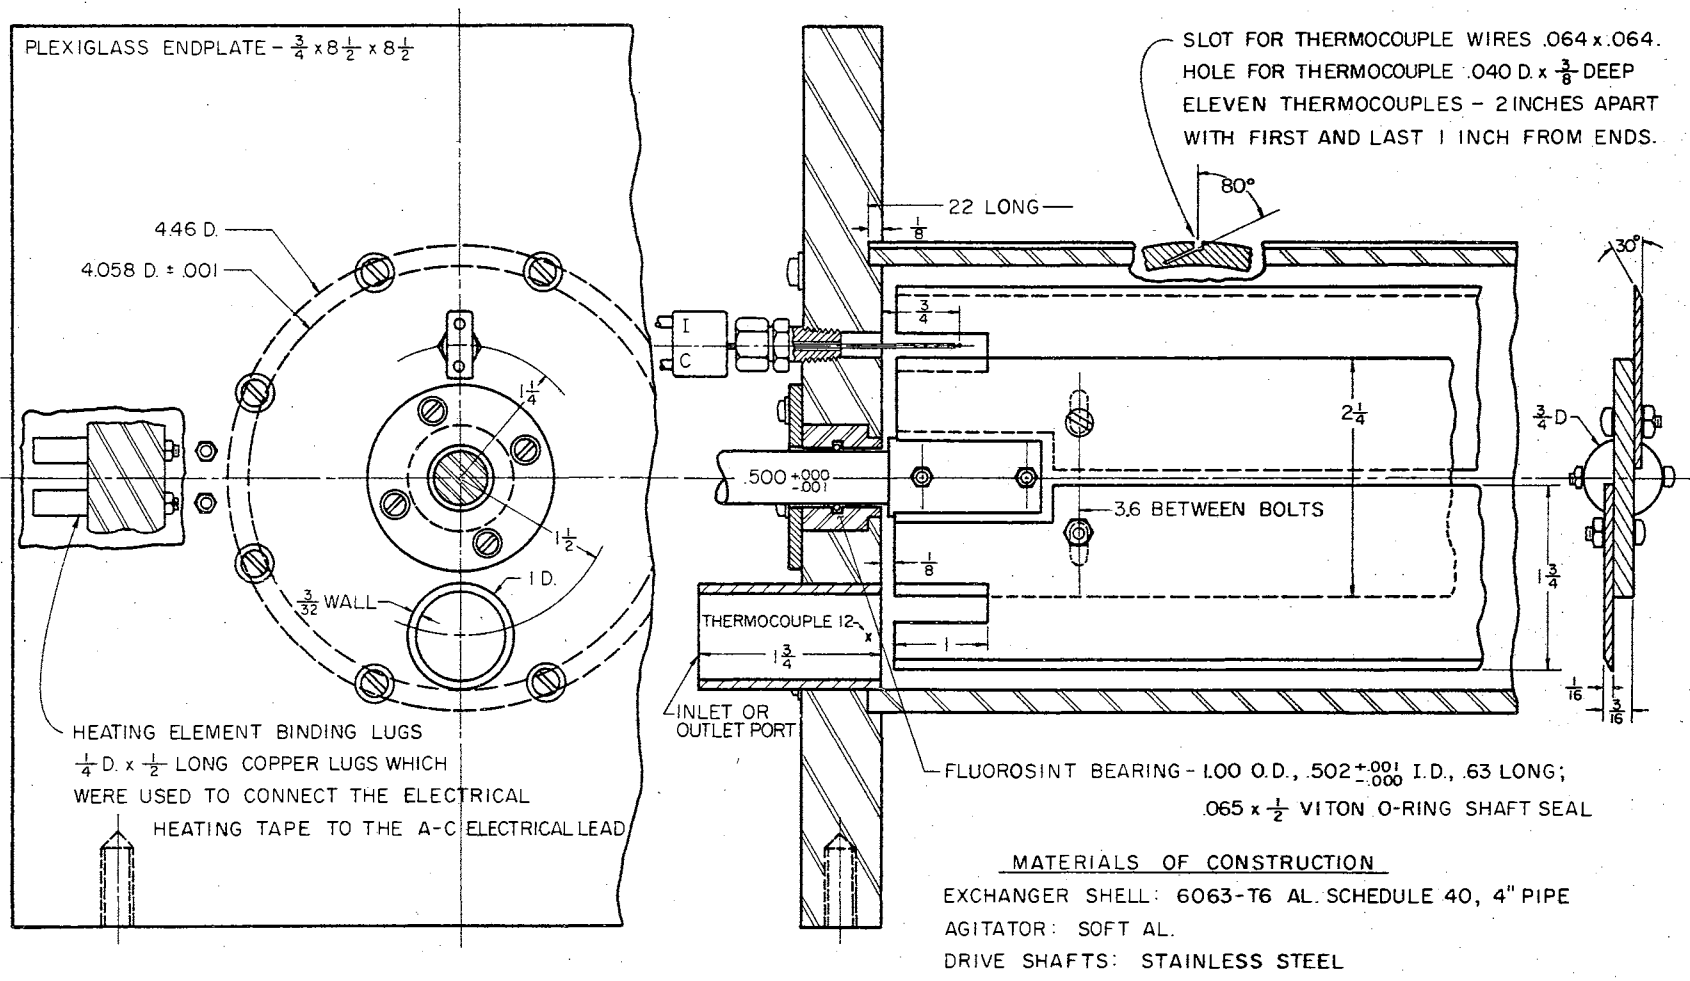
ASSEMBLY DRAWING OF THE TEST HEAT EXCHANGER.
